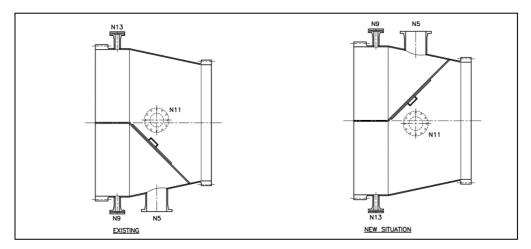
existing design (left); water inlet box at bottom tube sheet; (left) and modification, water inlet at top tube sheet (right)
